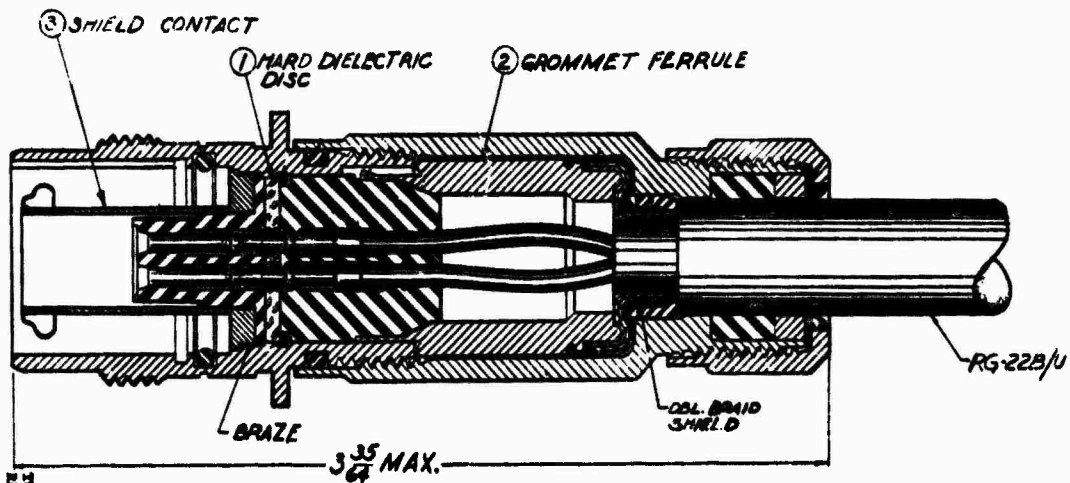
TWO-CONDUCTOR SHIELDED CABLE RECEPTACLE CONNECTOR ASSEMBLY
